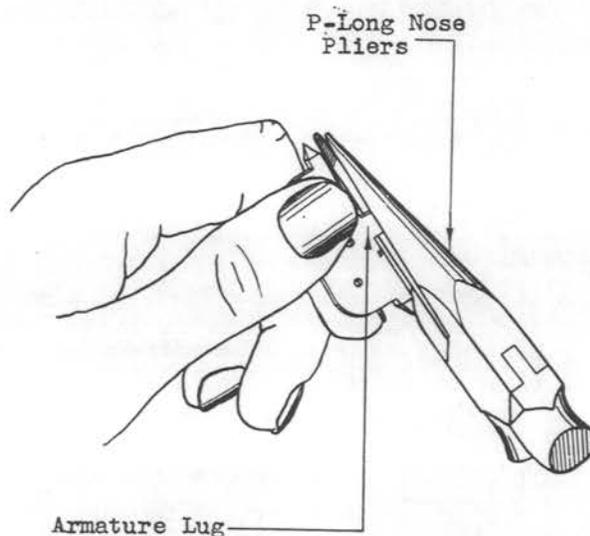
Method of Adjusting Armature Lug Nos. 2-D and 2-E Buzzers
